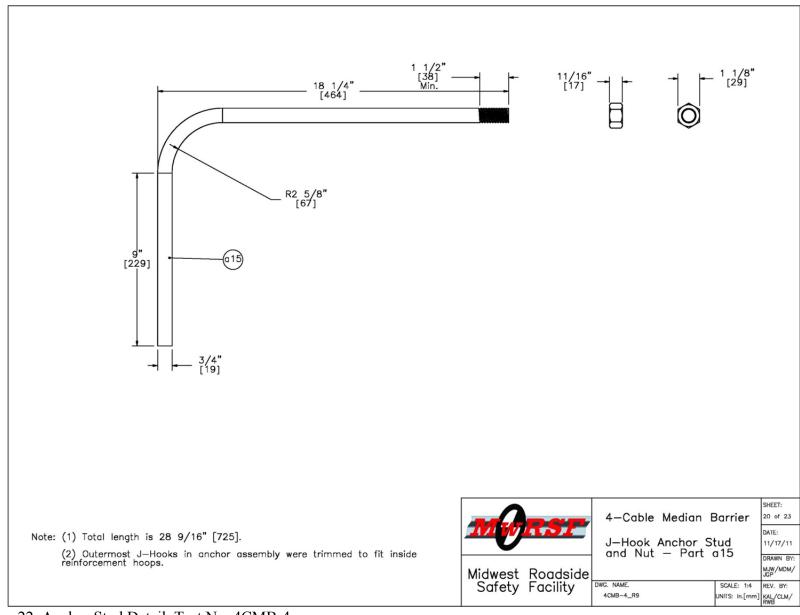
Anchor Stud Detail, Test No. 4CMB-4
